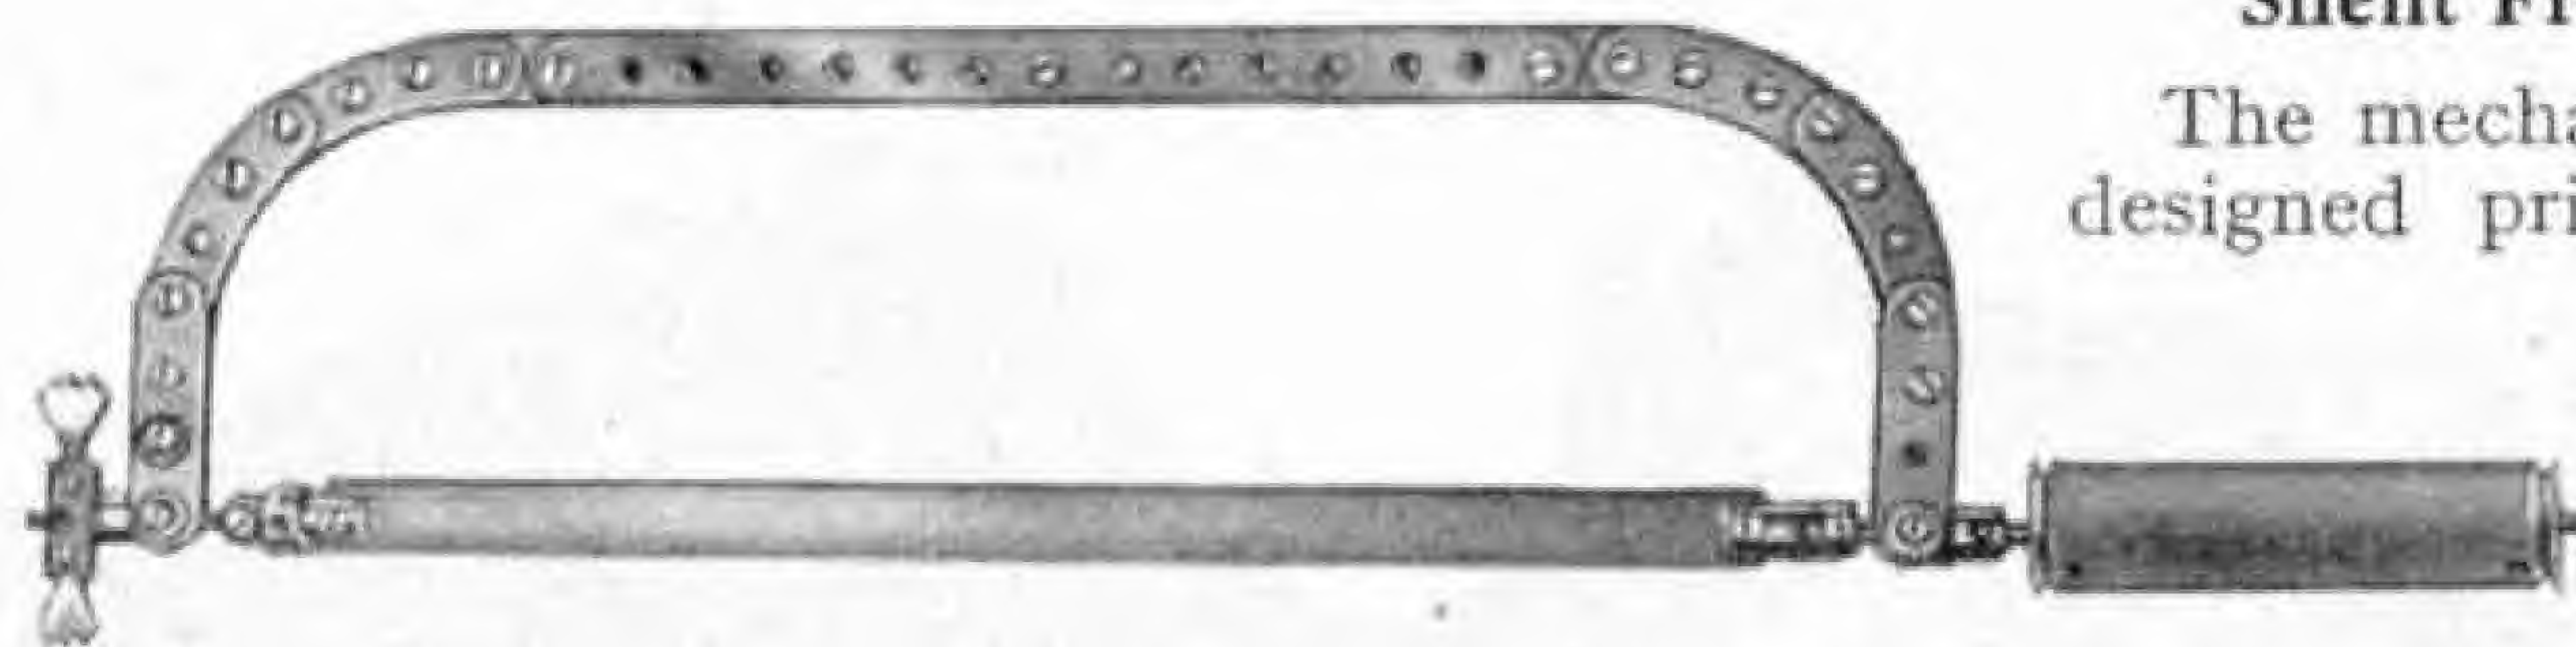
A useful Hacksaw Frame, built from Meccano parts.
